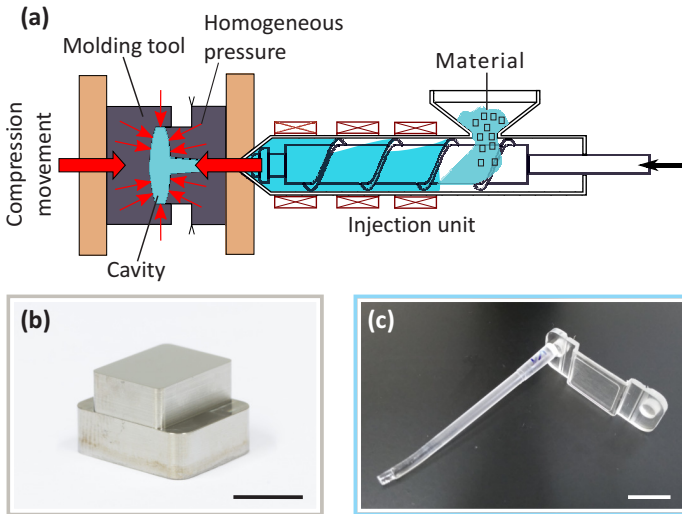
Injection compression molding setup for Fresnel lens replication. (a) Fabrication setup. (b) Ti molding tool. (c) Polymer part after molding. Scalebars: 1 cm.
